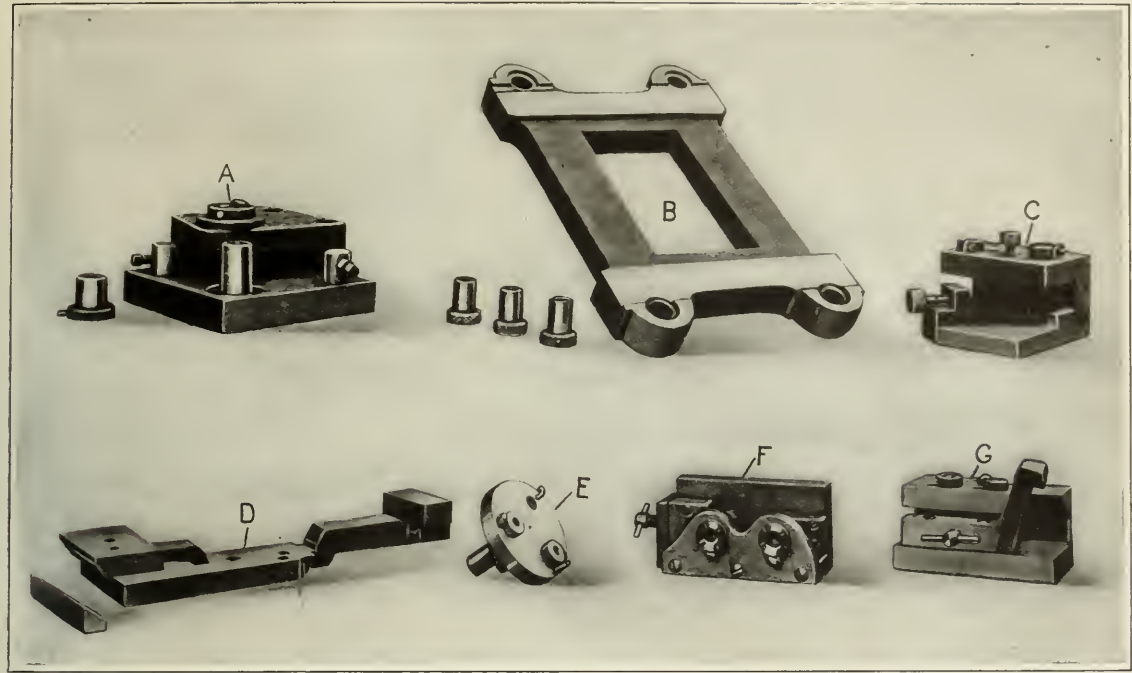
A, Drill Jig for Index Levers; B, Drill Jig for Clamping Screws for Carriage and Cap; C, Drill Jig for Cross-slide Stop; D, Drill Jig for Cross-slide Cam Fork Bearing and Hole for Lock Bolt Spring; E, Drill Jig for Gear-box Pawl Holder; F, Drill Jig for Clutch Shifter Arm; G, Drill Jig for Feed Chuck Arm
